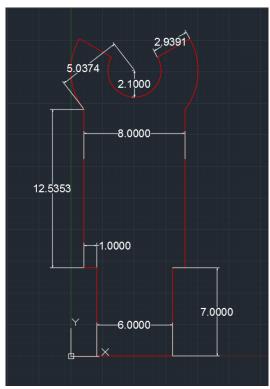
Gear Holder AutoCAD Drawing, Dimensions in mm
